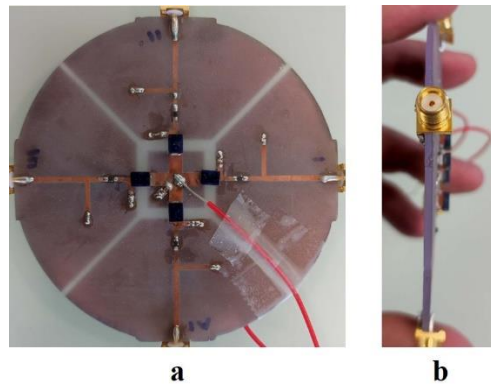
Fabricated circuit with mounted components (a. Front view; b. Side view)
